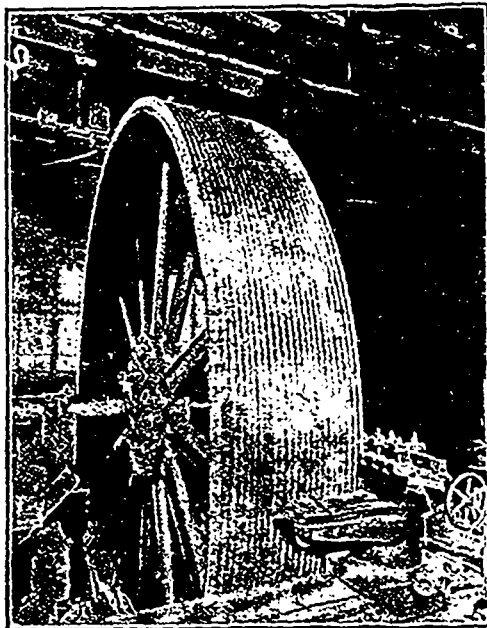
ENORMOUS ROPE PULLEY SHOWING GROOVES. MADE BY LAURIE ENGINE & MACHINE CO., MONTREAL.
